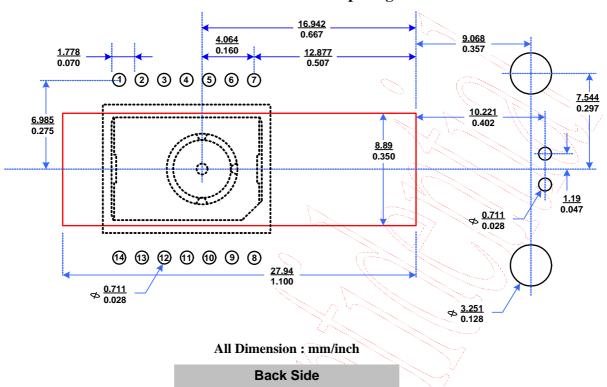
Recommended PCB Mechanical Cutouts and Spacing
